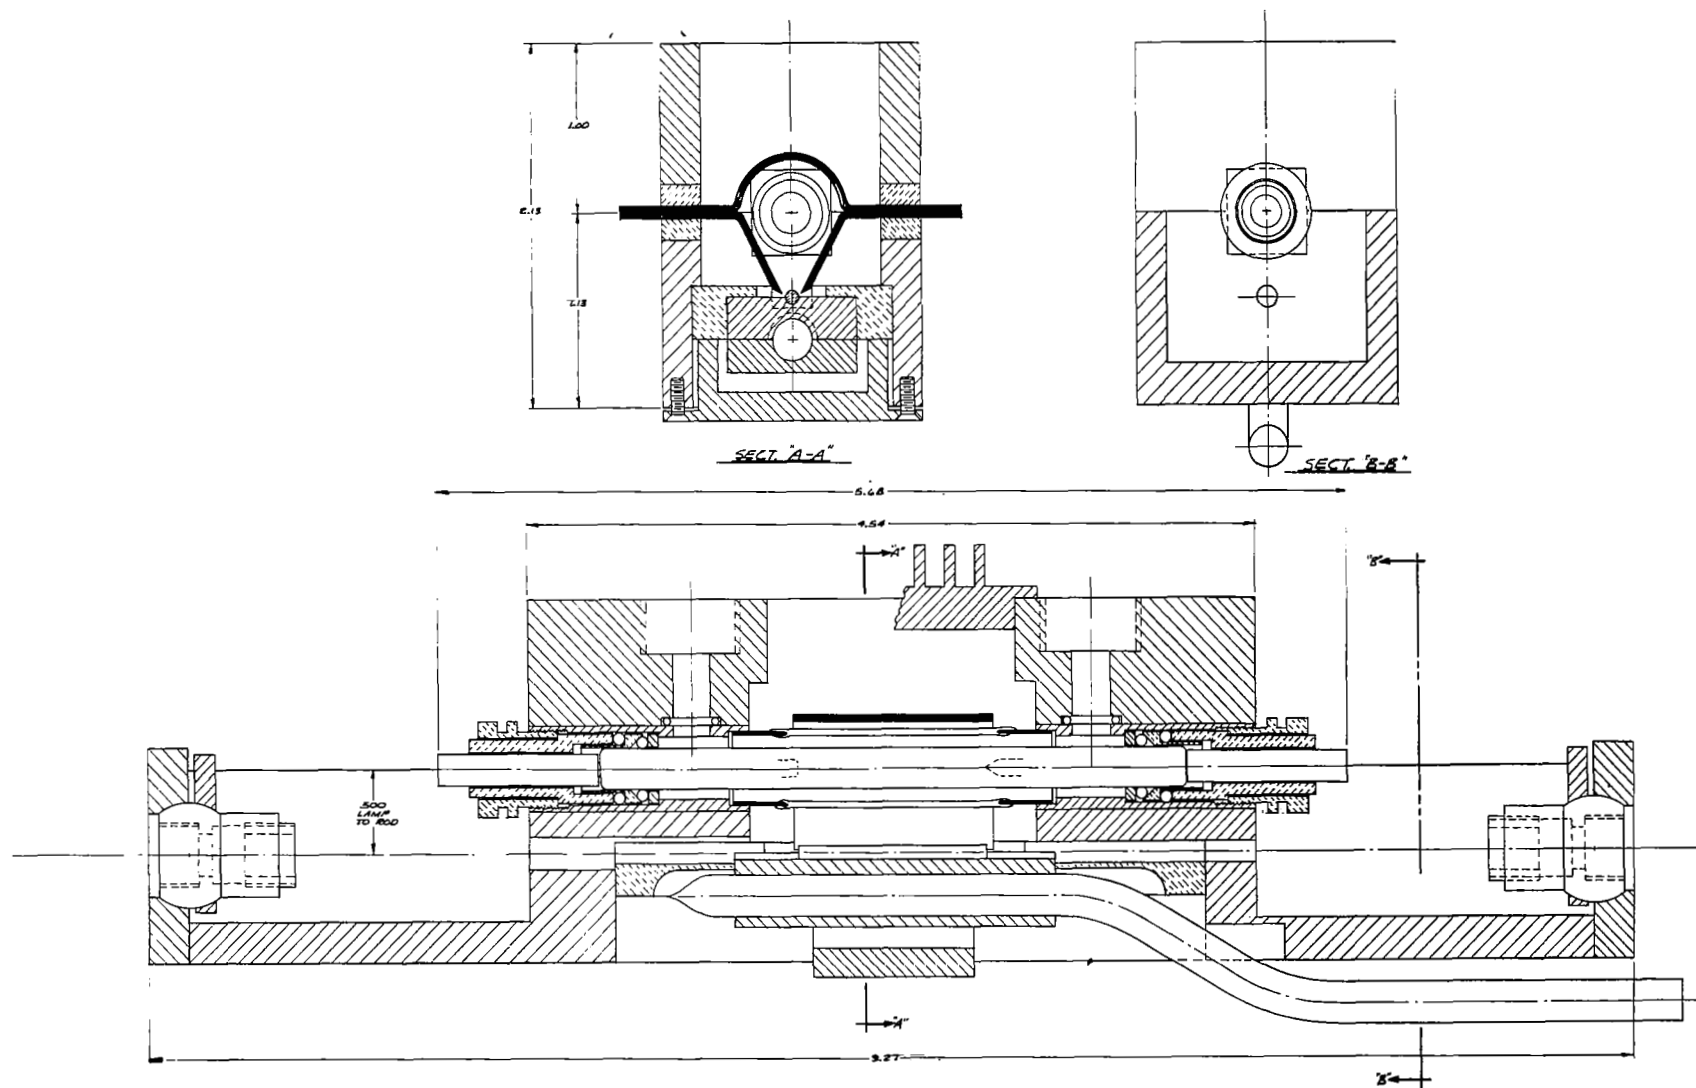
Assembly Drawing of Krypton Arc Pumped Conductively Cooled Nd:YAG Laser.
